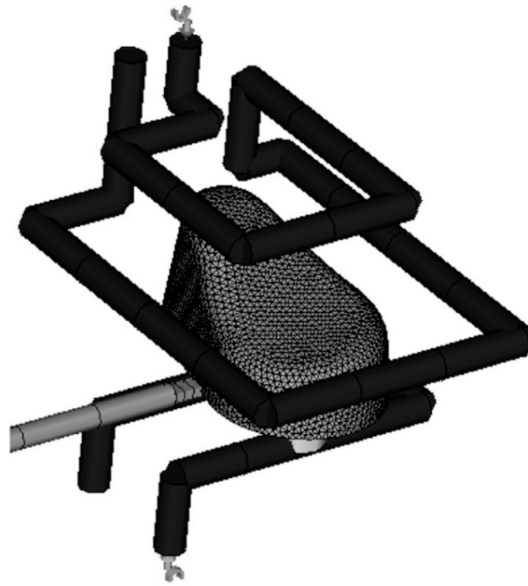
Conventional cooling channel (straight-drilled holes) in mold [2]
